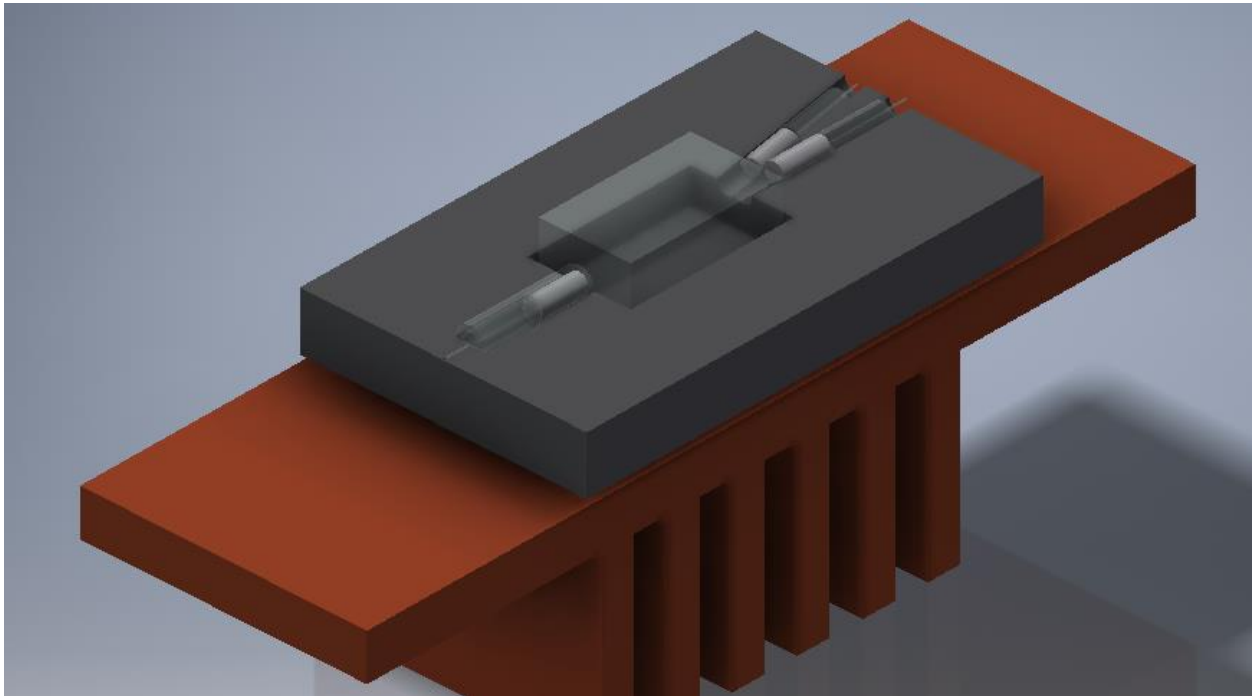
View of the VBG wavelength splitting assembly. Multiple wavelength light is introduced from the left by a collimating GRIN assembly. The VBG splits the wavelength of interest off at an angle of 10° into a GRIN/fiber assembly. The remaining light is captured by a GRIN/fiber assembly for further filtering downstream. The assembly is mounted on a TEC for temperature control of the VBG. The TEC itself is mounted on a copper heat spreader. Titanium or Ultem spacers are used between the copper and optics bench to reduce heat transfer.
